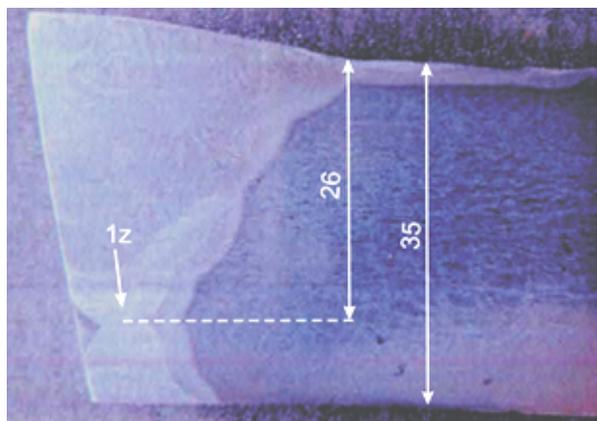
Macrostructure of the weld fragment; 1z – first (tack) weld in the root; the macrostructure of the weld was obtained from report [2]
